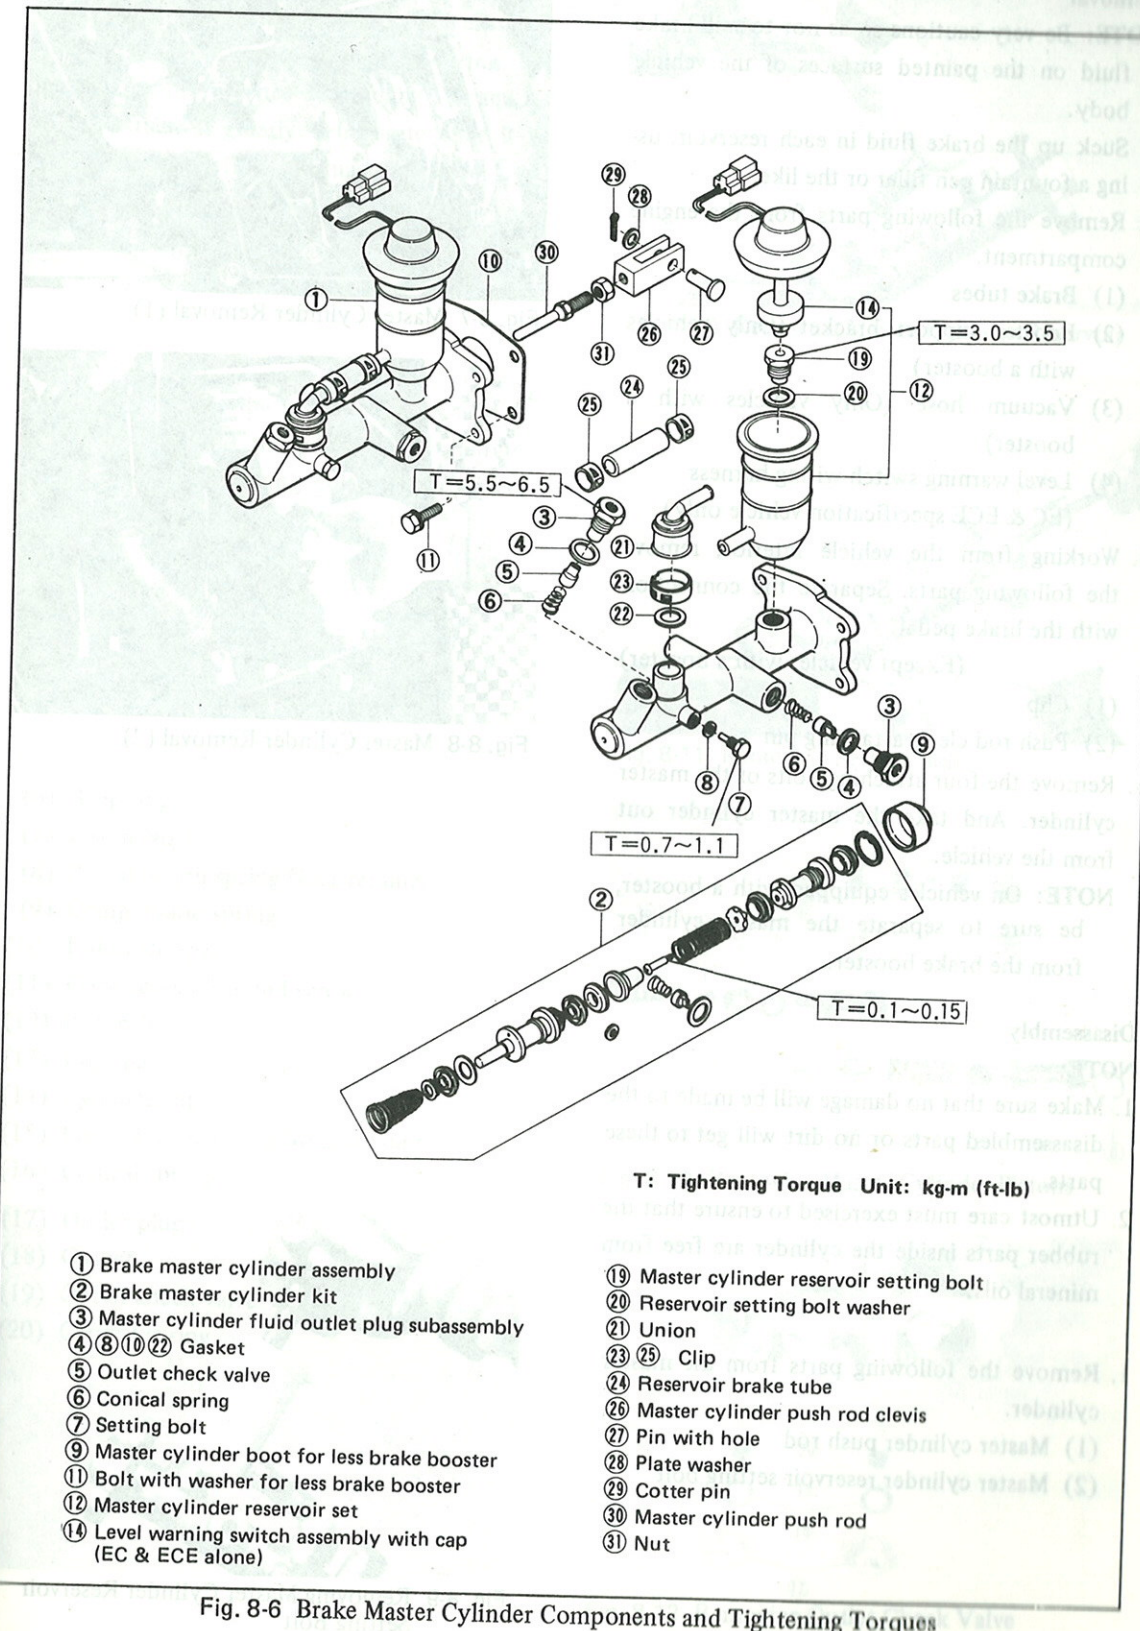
Brake Master Cylinder Components and Tightening Torques
